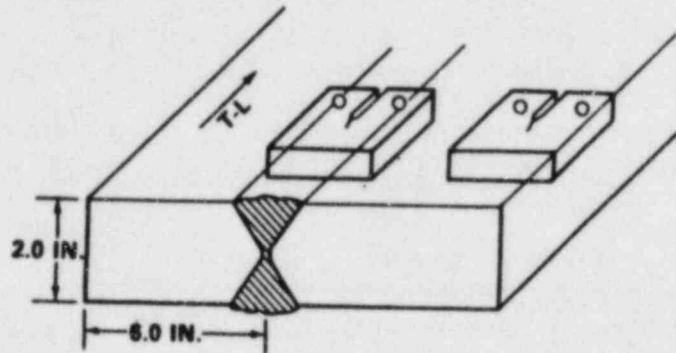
Weld Parameters and Geometry for Type 304 Stainless Steel Plate Weld
